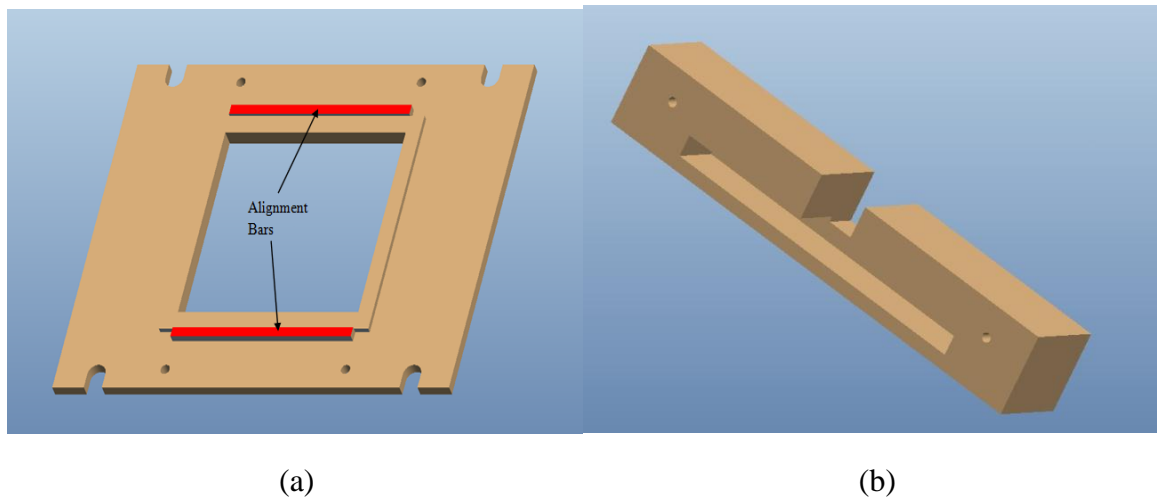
Fixture Additions: (a) Alignment Bars (b) End Clamp
